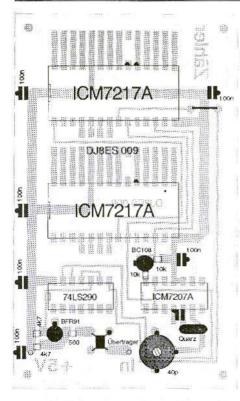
Component Layout of the Counter Module. Surface-mount components are placed on the track side of the PCB
